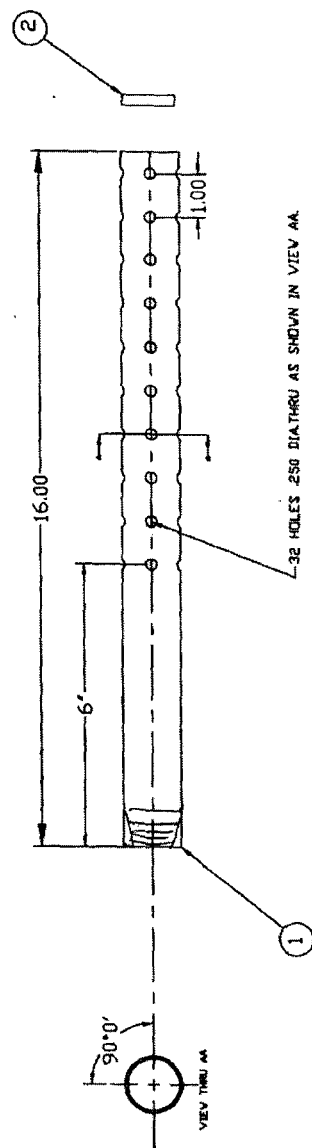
F: CAD drawing of bag-house center piece with "O"-ring grooves.
